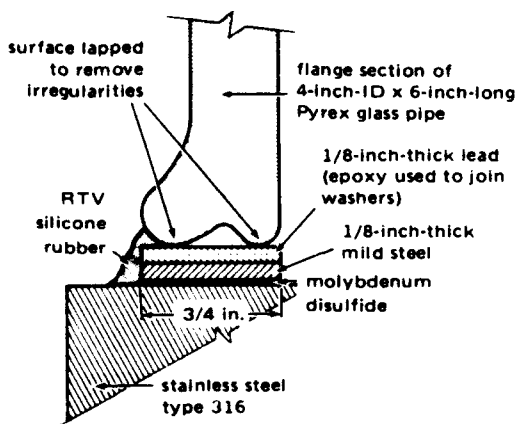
Experimental sealing and bearing system utilizing a composite lead-steel washer between the glass pipe end flange and the metal end-closure plate.
